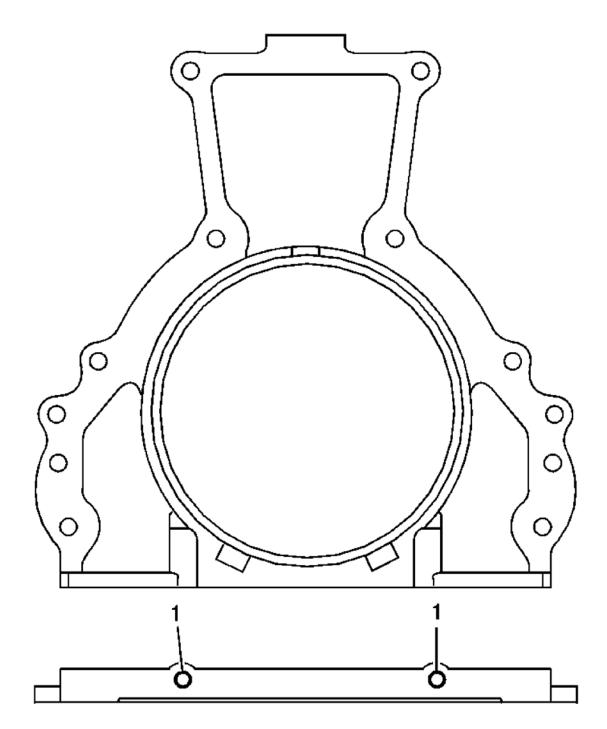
Crankshaft Rear Oil Seal Housing Thread Repair Courtesy of GENERAL MOTORS CORP.
